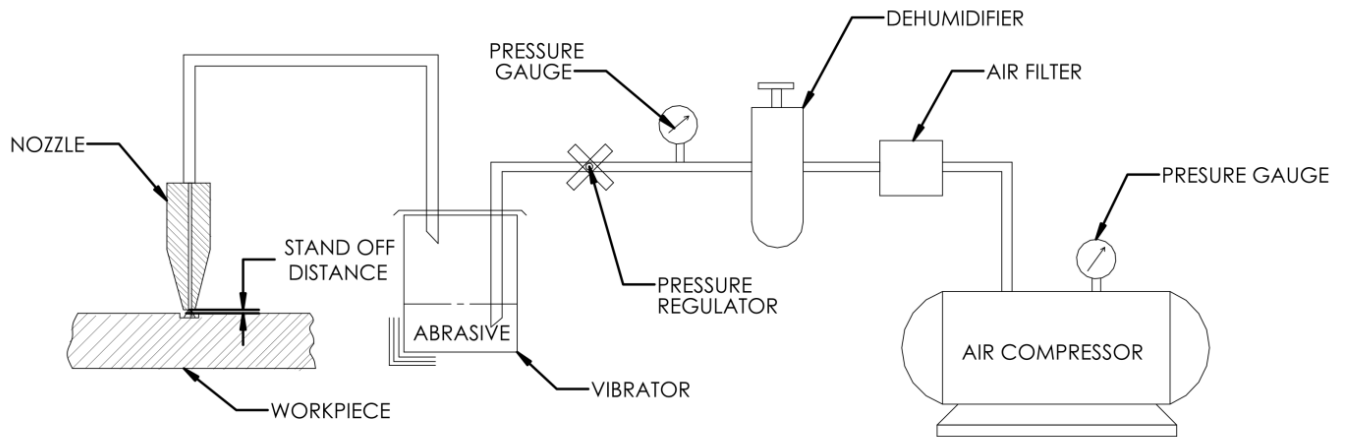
SCHEMATIC LAYOUT OF ABRASIVE JET MACHINE
